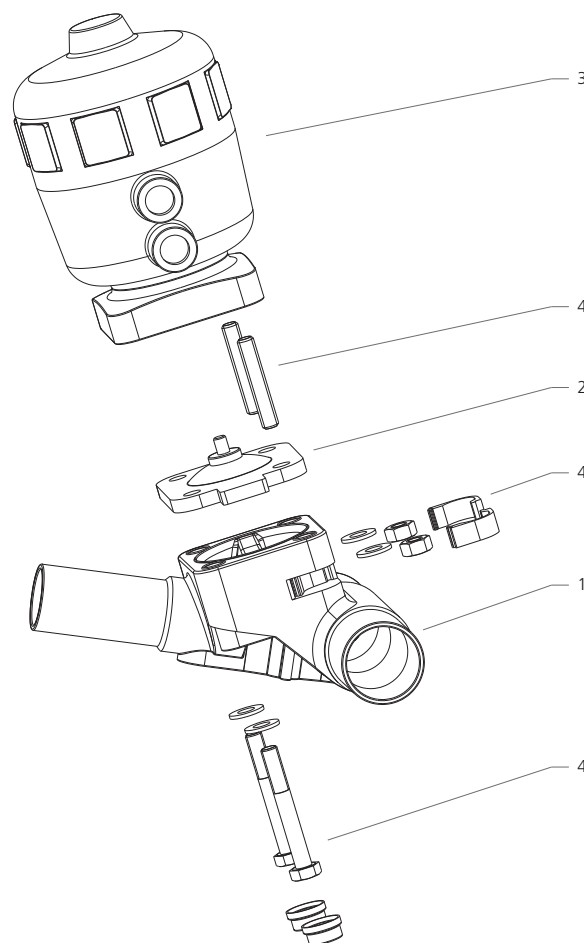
Exploded assembly drawing using the example of PVDF-UHP.
